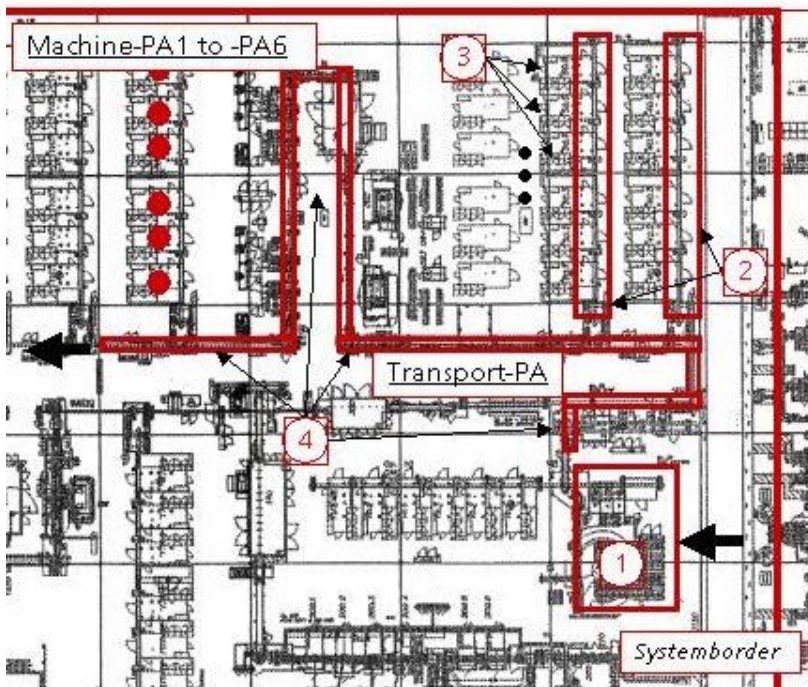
Agentification of a plant (layout: motor engine assembly)
